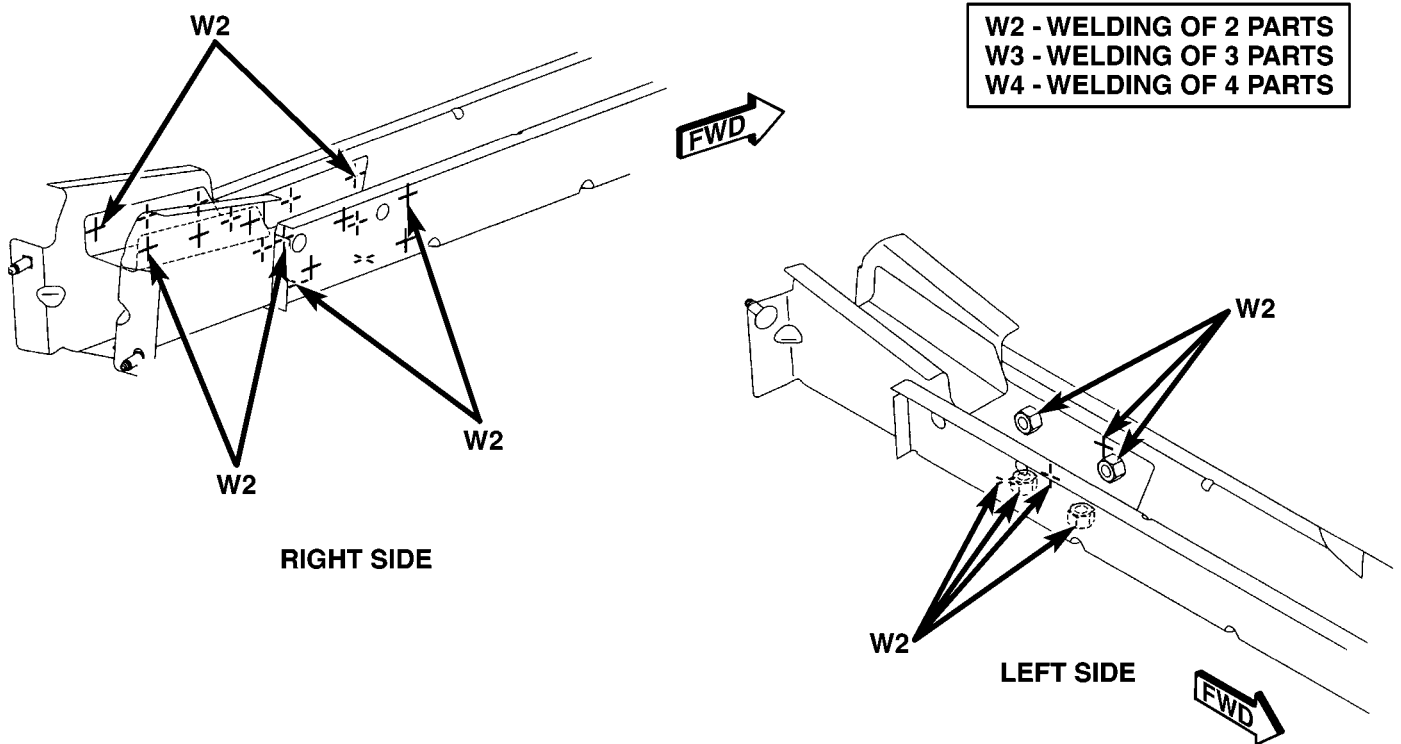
REAR FLOOR PAN SIDE RAIL AND REAR BUMPER ATTACHING REINFORCEMENT TO REAR RAIL EXTENSION
